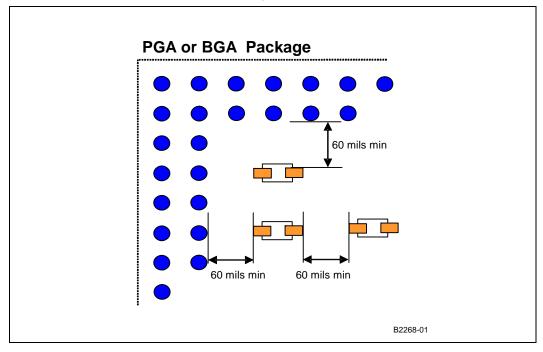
Pad-to-Pad Clearance of Passive Components to a PGA or BGA
